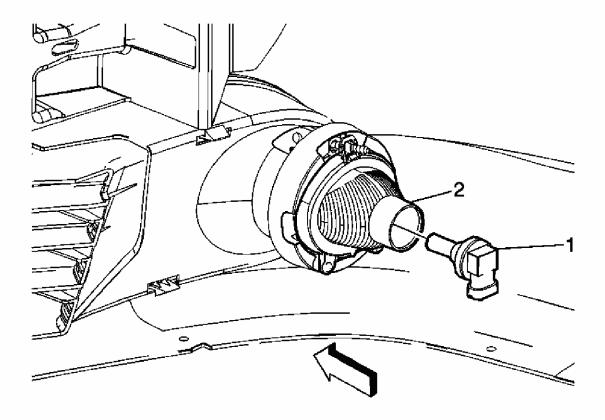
Removing/Installing Front Fog Lamp Bulb Courtesy of GENERAL MOTORS CORP.
